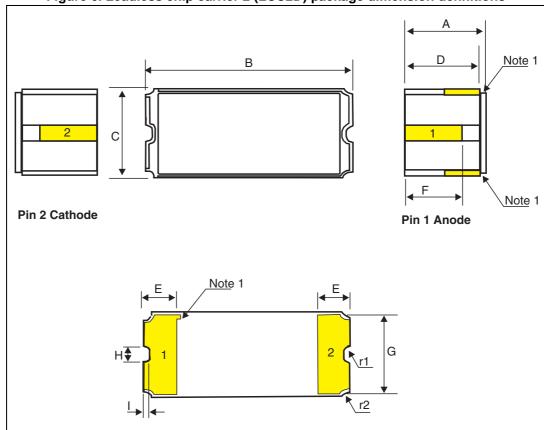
Leadless chip carrier 2 (LCC2D) package dimension definitions
